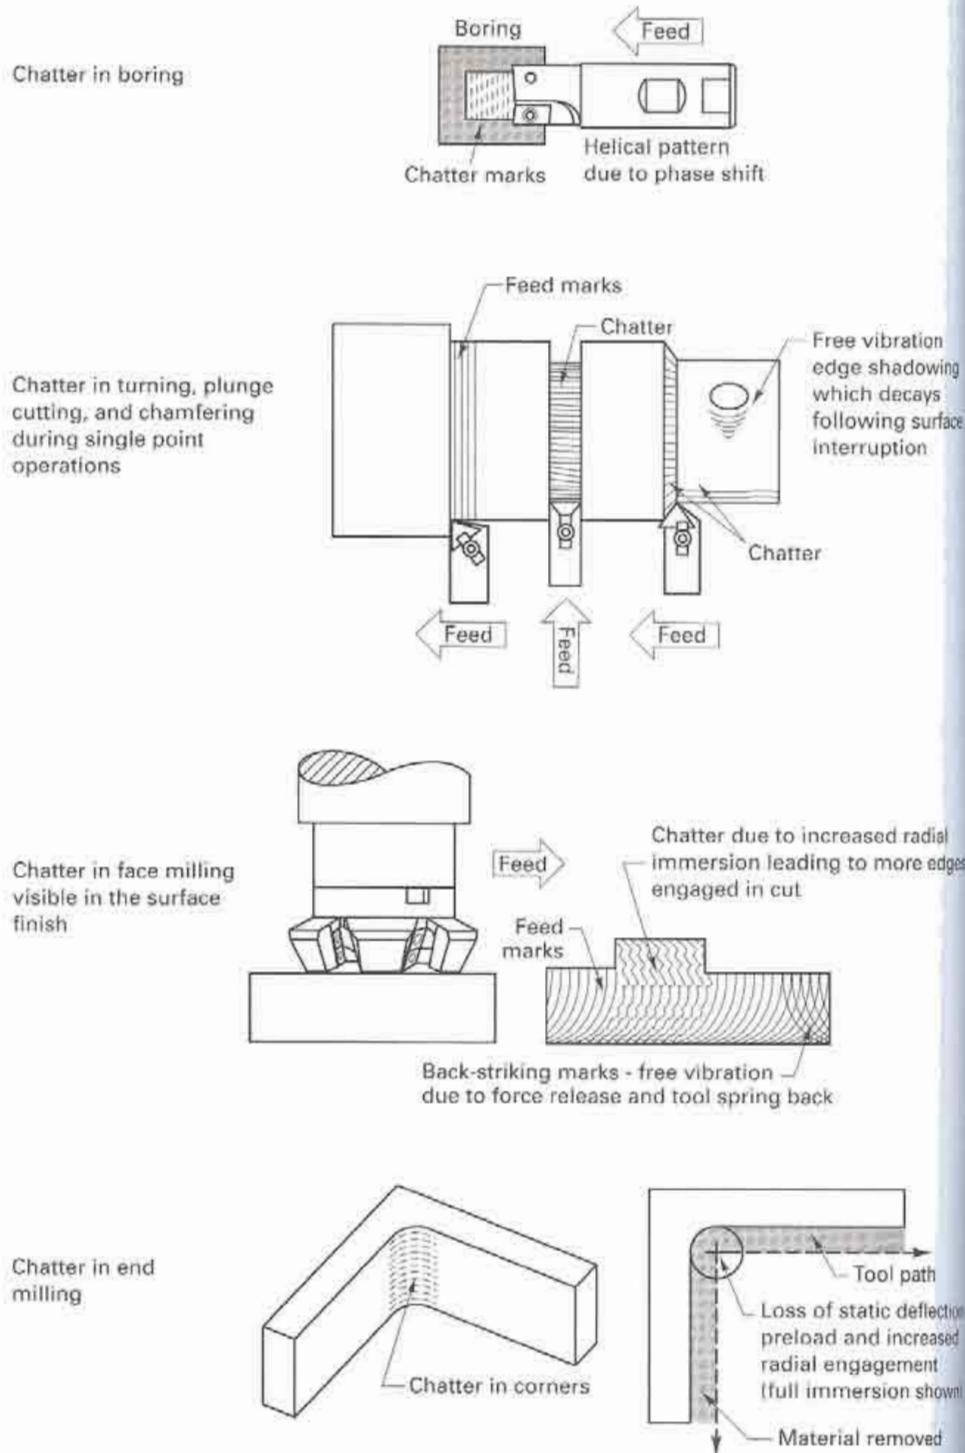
Some examples of chatter that are visible on the surfaces of the workpiece.
